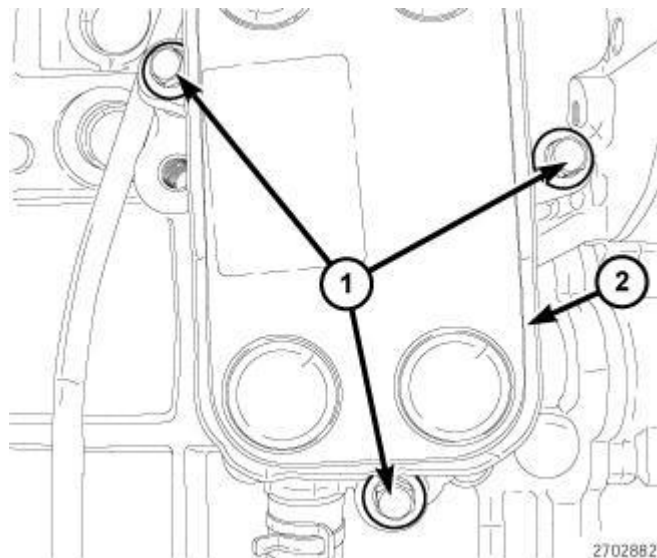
OIL FILTER HOUSING ADAPTER & BOLTS
